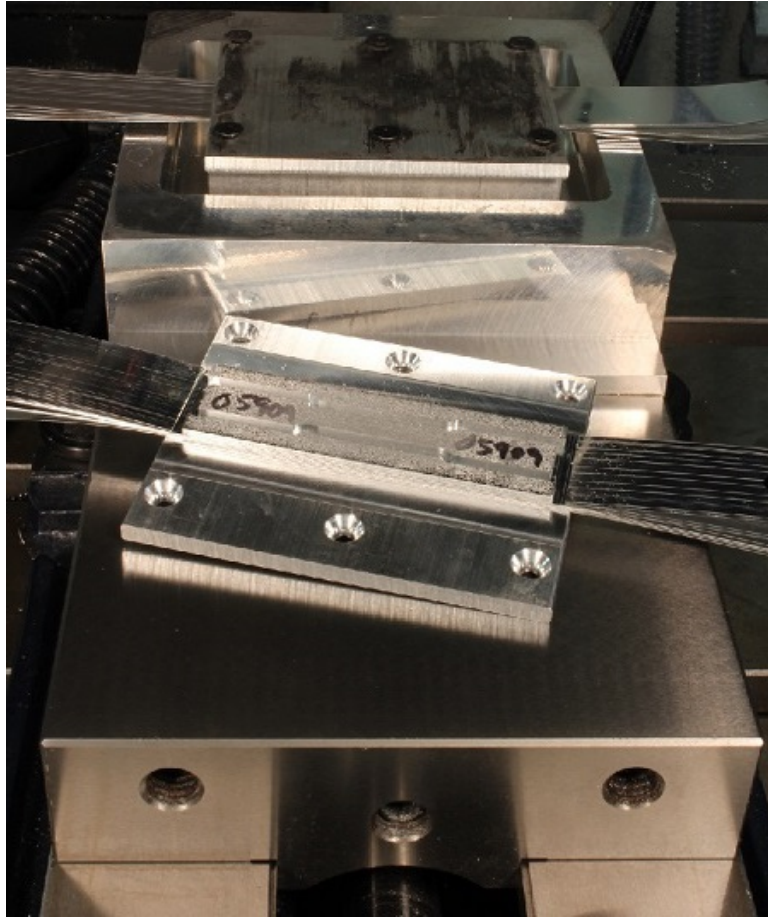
(TOP) Dog-bone shape mounted to be removed from the base plate on a custom fixture. (BOTTOM) Sample with dog-bone shape cutout, before being removed.
